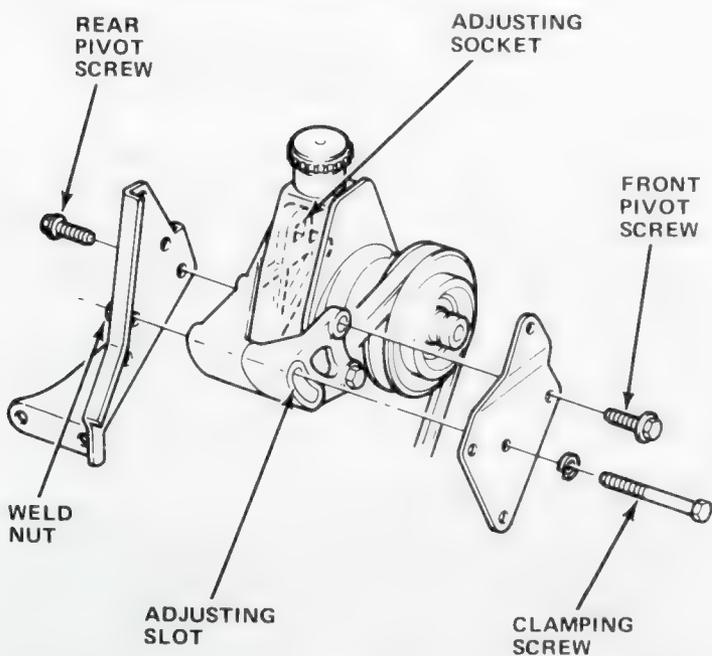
C-19 Power Steering Pump Drive Belt Adjustment—Six-Cylinder
